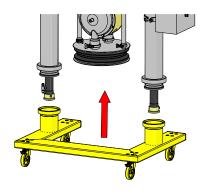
Gently lift up the device and place actuator bushing in the wheeled baseplate. Lock the wheels.
